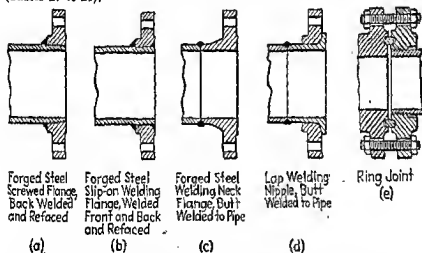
Welded Flange Joints and Ring Joint.
